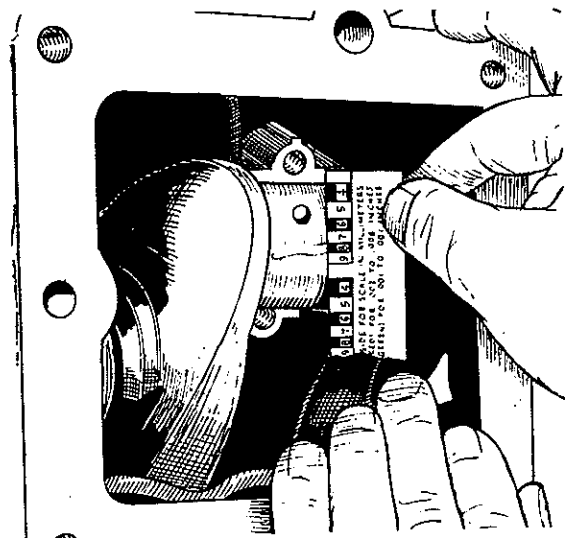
MEASURING BEARING CLEARANCE WITH PLASTIGAUGE
